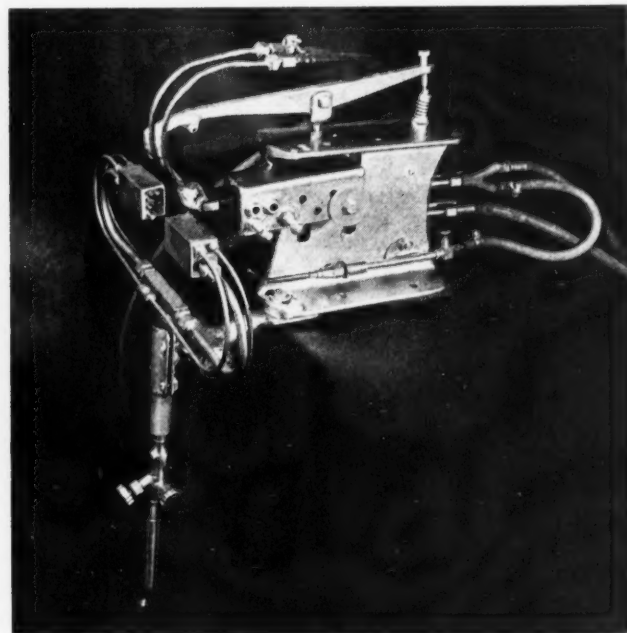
To Avoid Overheating of Ordinary Carbon Tool-steel Inserts, a Water-cooled Heat-dissipator Shoe is Brought to Bear against the Insert. Heat is Applied to the Shank Directly behind the Brazing Joint
